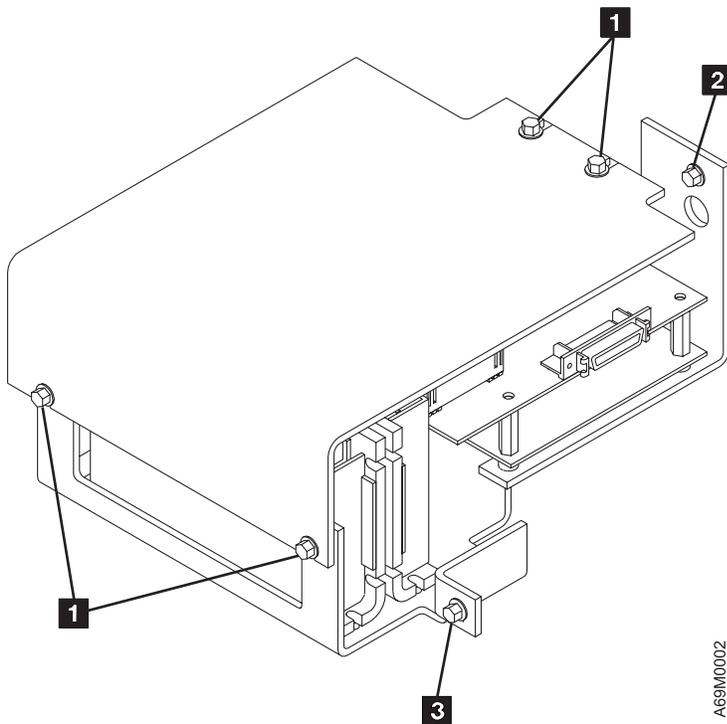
Motor Driver Assembly (MDA). (Shown with cover installed)
